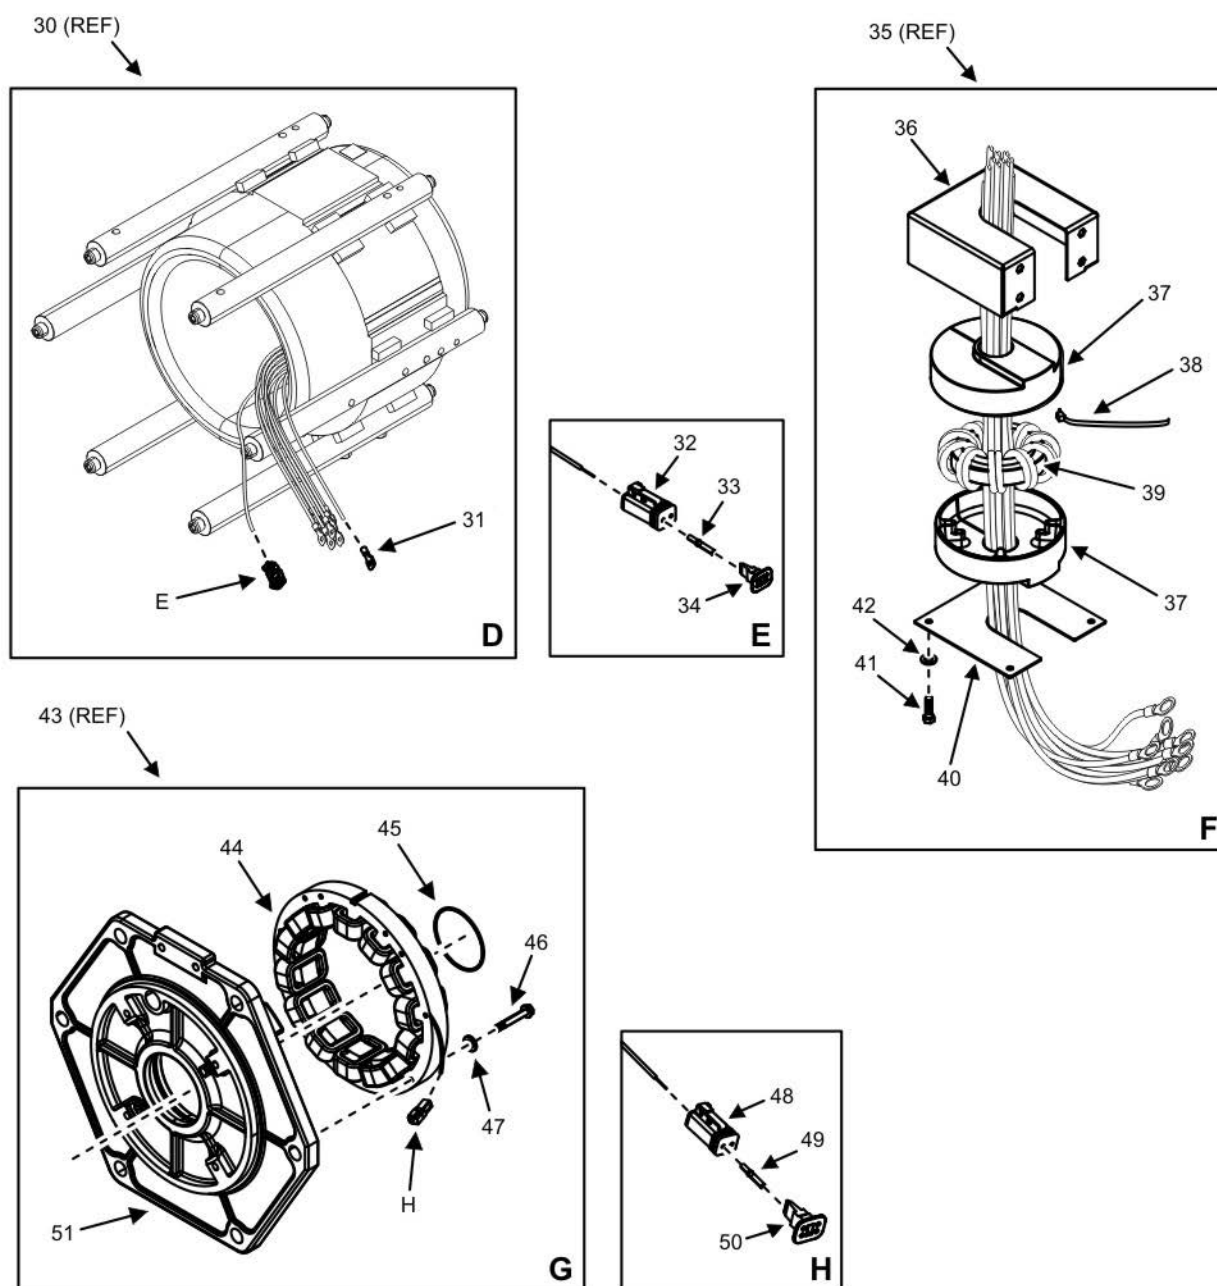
AC Generator Assembly, 50/60 Hz (Sheet 4 of 5).
